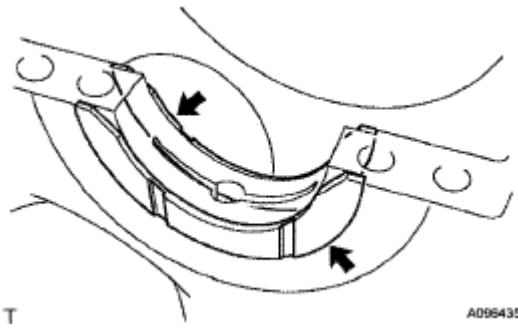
Locating Upper Bearings And Upper Thrust Washers
